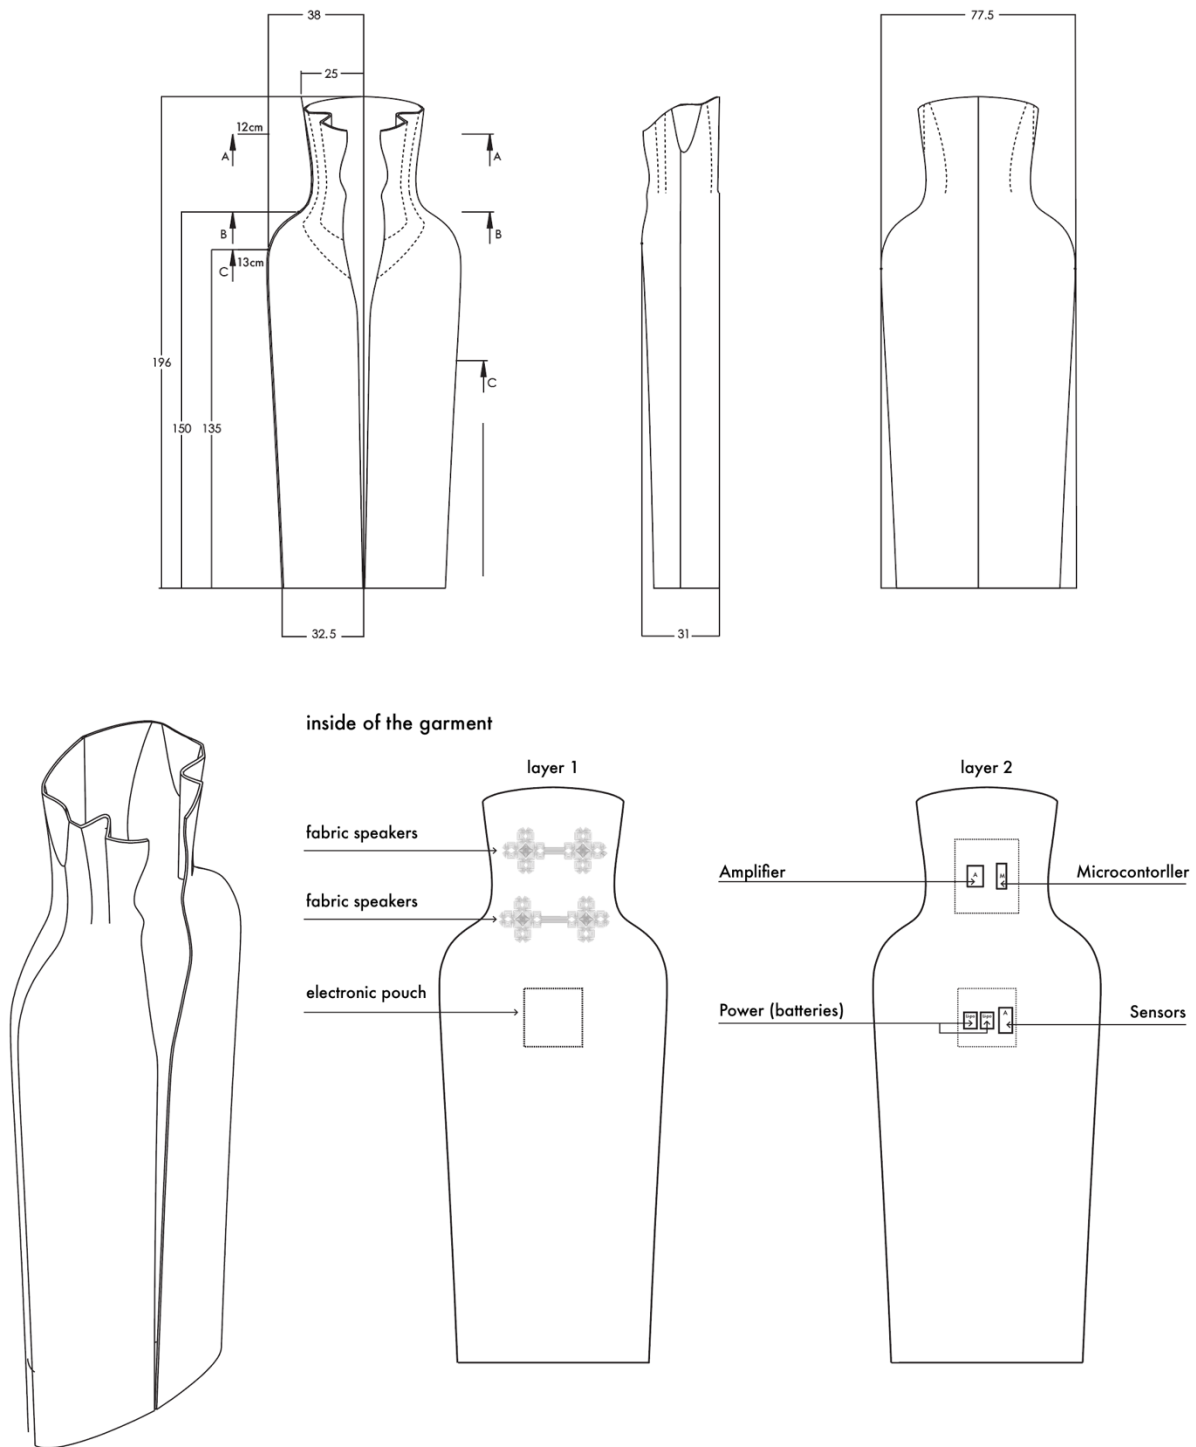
Technical drawings with dimensions, multiple views, placement of fabric speakers and electronic components
